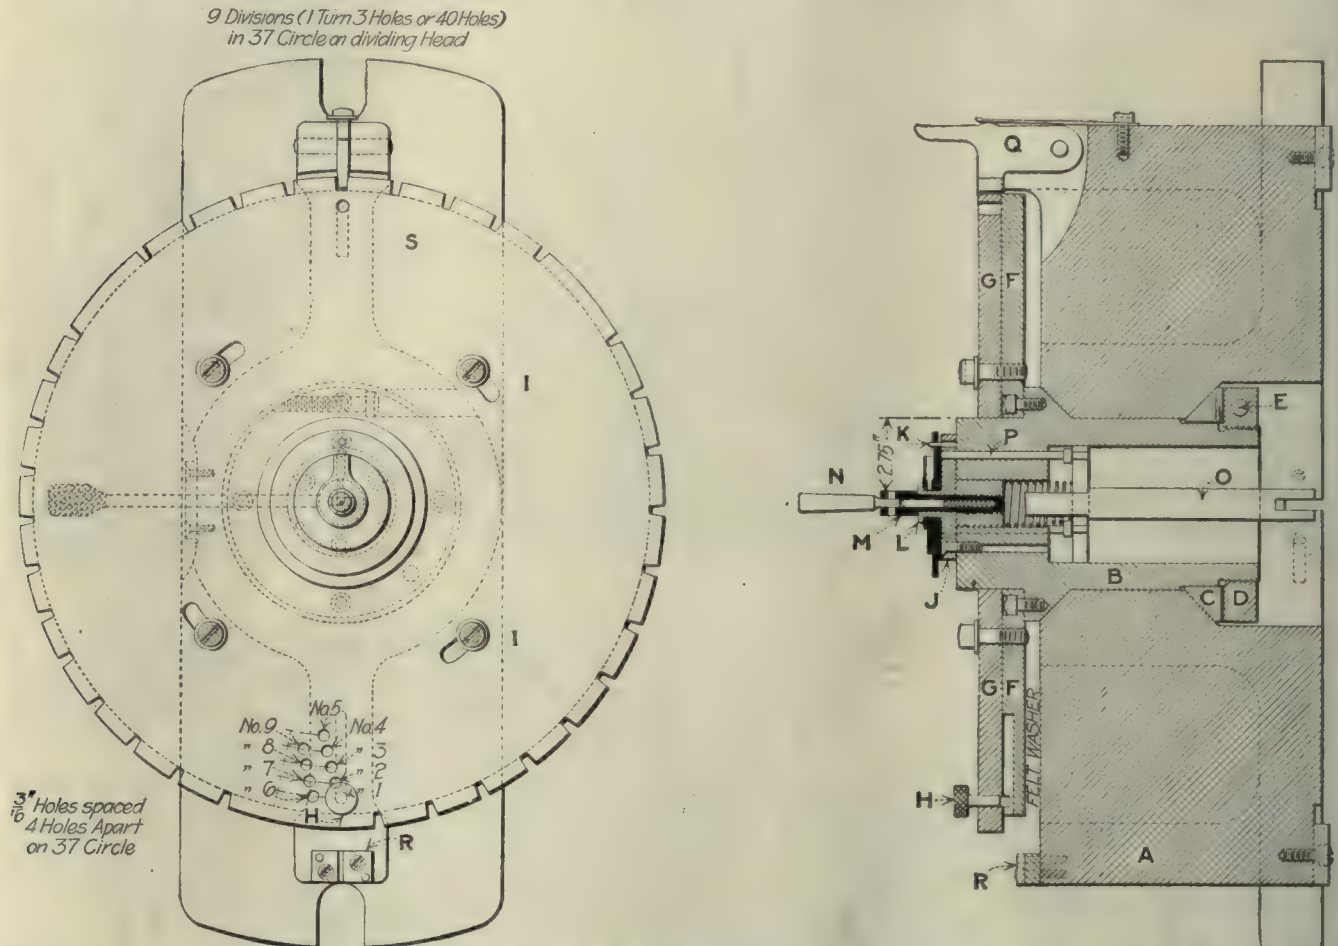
CONSTRUCTION OF MILLING FIXTURE FOR SLOTTING DIALS
